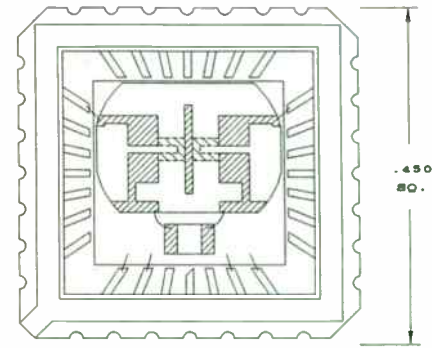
A 4-Pole, Single Wafer LCC Assembly.
